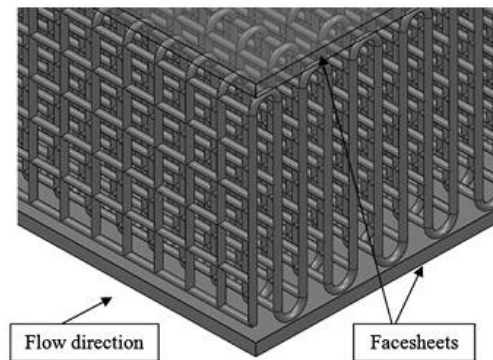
WMHE with folded wire screen and brazed metallic sheets [8]
